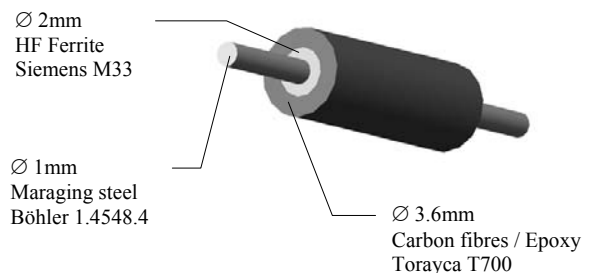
Dimensions and materials of high speed spindle capable of rotating at 7 Mrpm.
